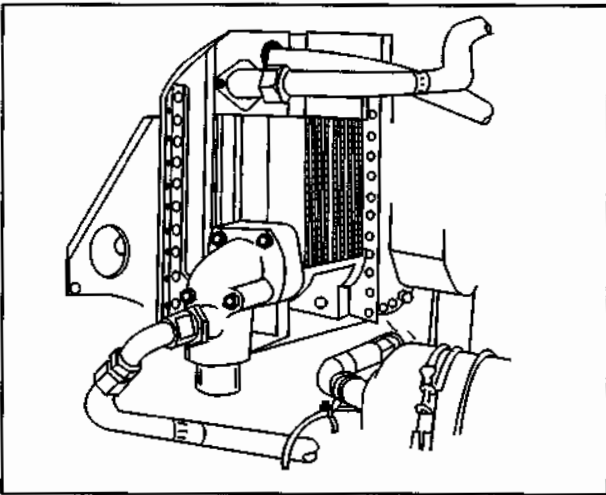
When inspecting an oil cooler, note any sign of leakage, which can indicate a crack in the cooler's core. If you suspect a crack or if the cooler is no longer effectively cooling the oil, you should remove, inspect, and pressure-test the cooler.
